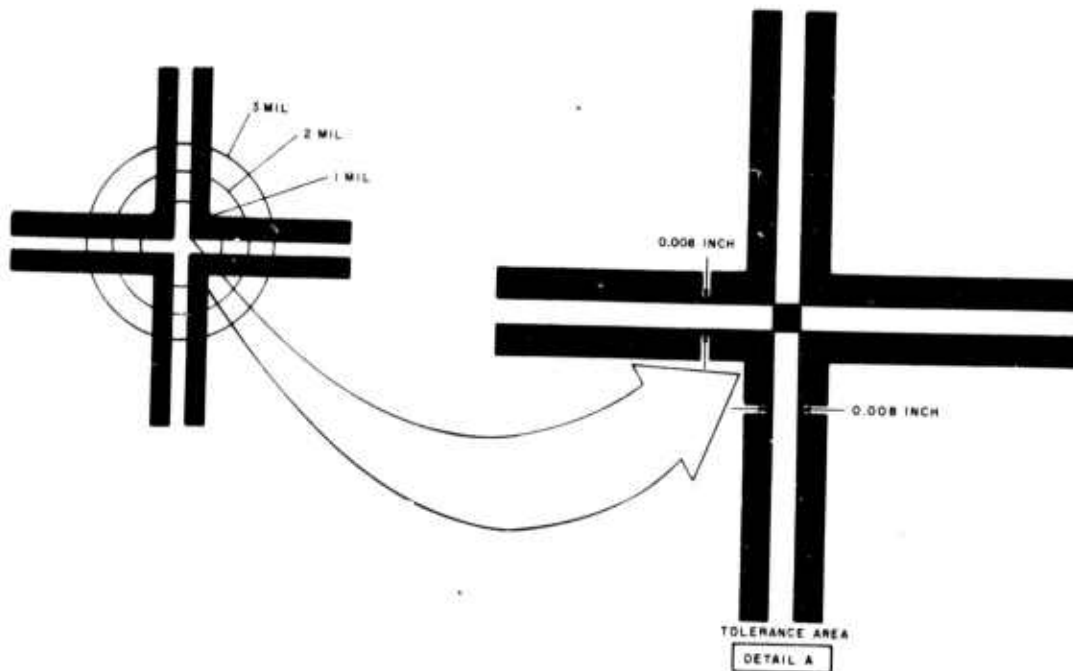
Radar Mount Boresight Tolerance.
